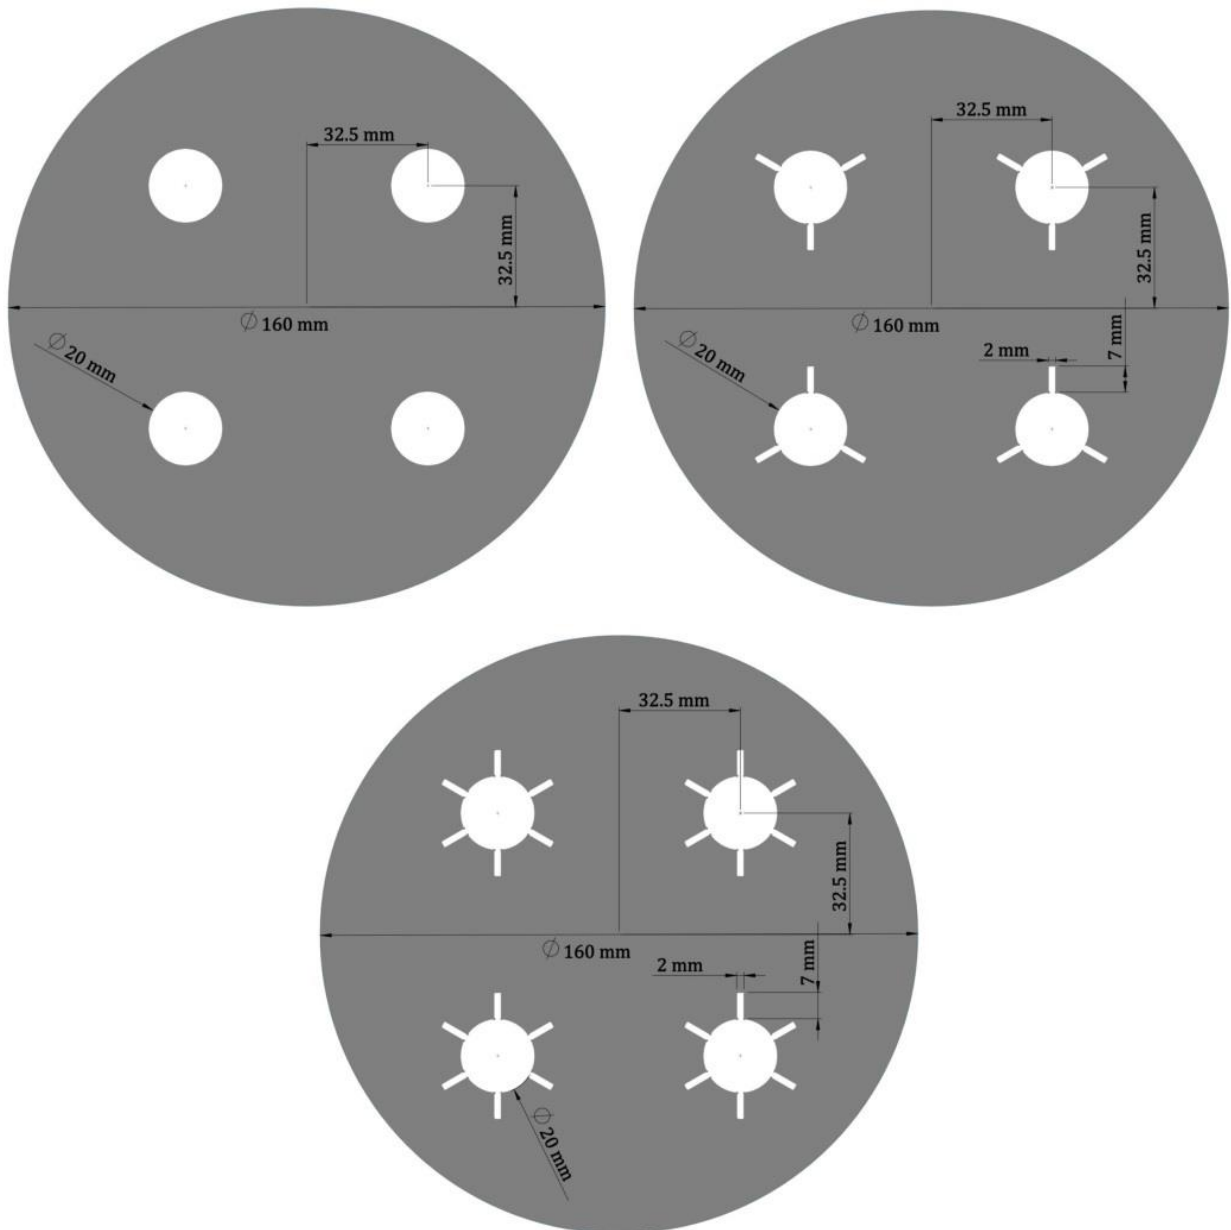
Geometrical dimensions of the circular shell PCMHE having circular tubes with 3, 6, and without fins
